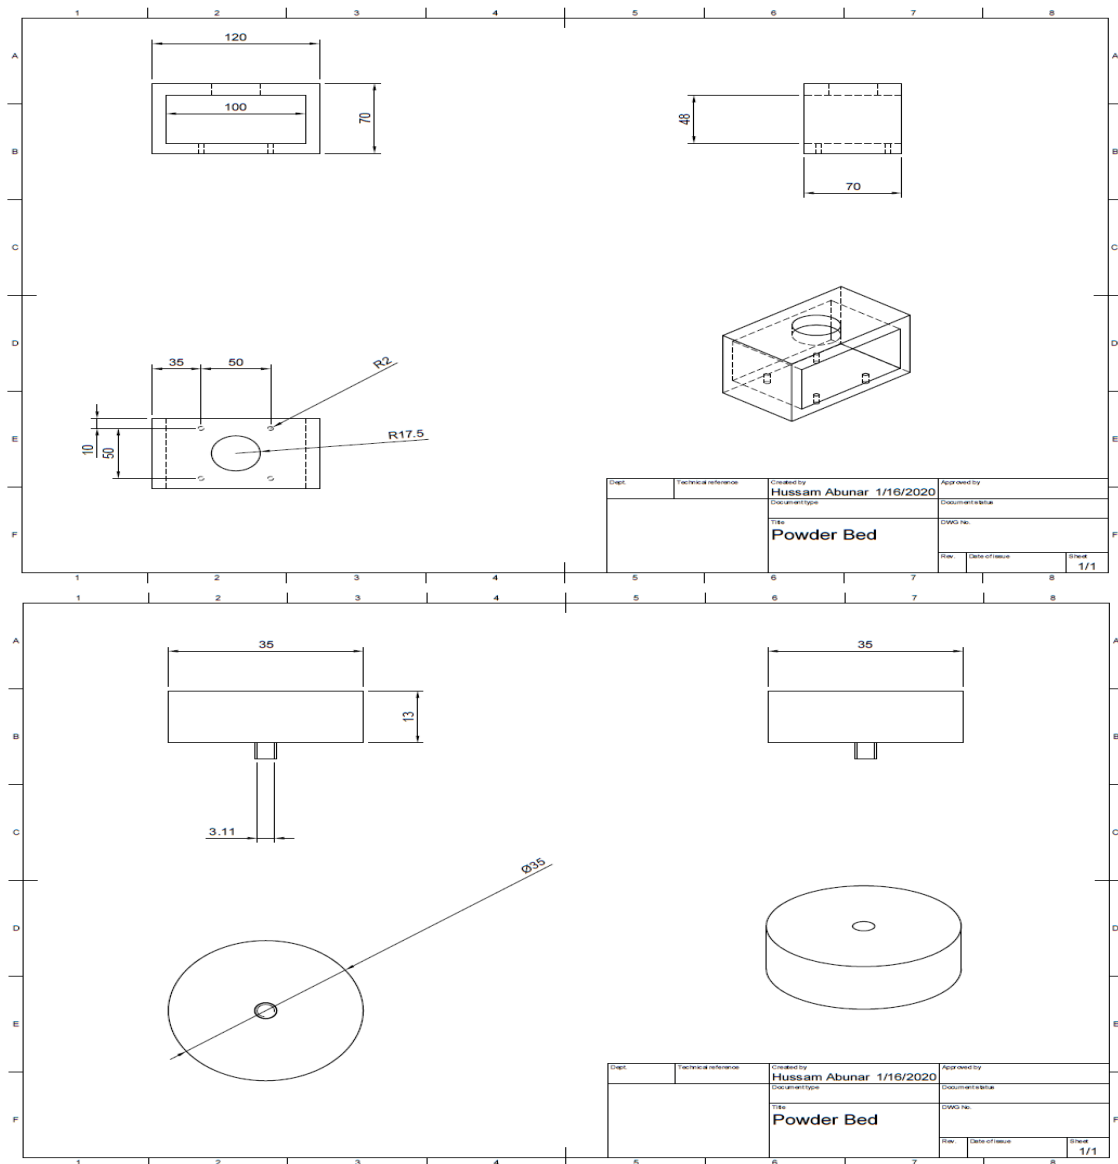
The design drawings of the manual powder bed used as a powder bed in some 3D printing buildings.
